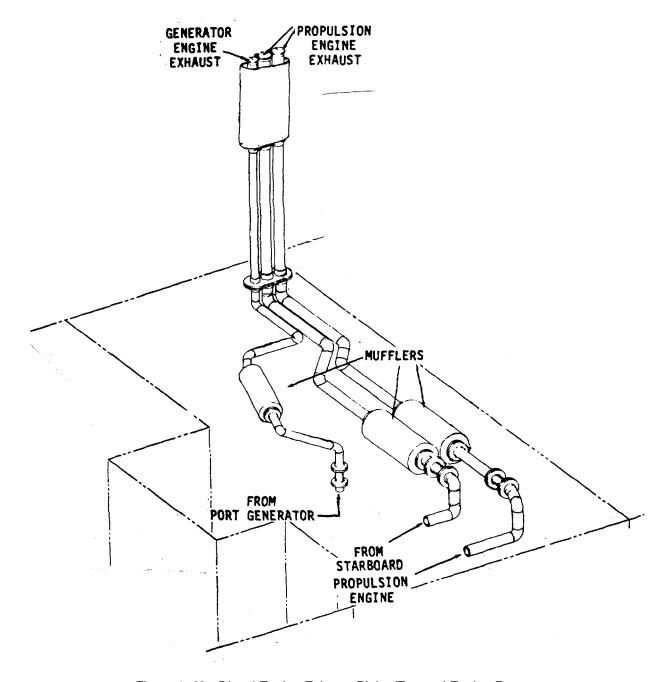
62. Diesel Engine Exhaust Piping/Forward Engine Room
